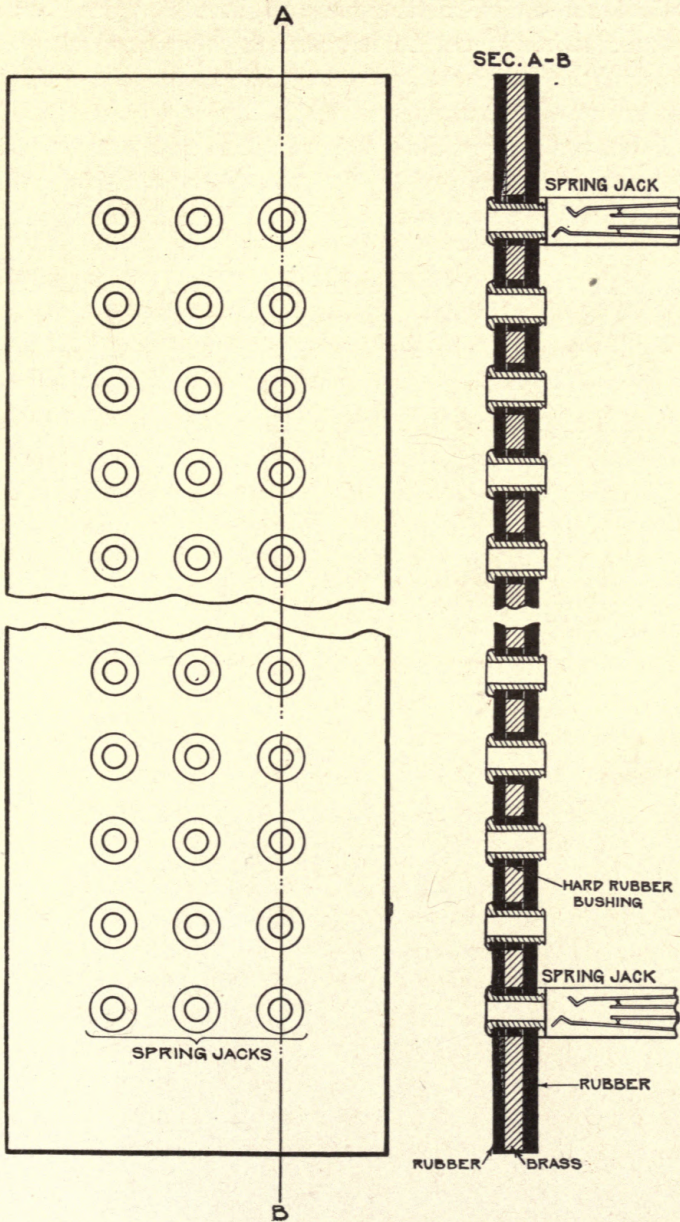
Construction of Jack Panels for Test and Morse Boards.
